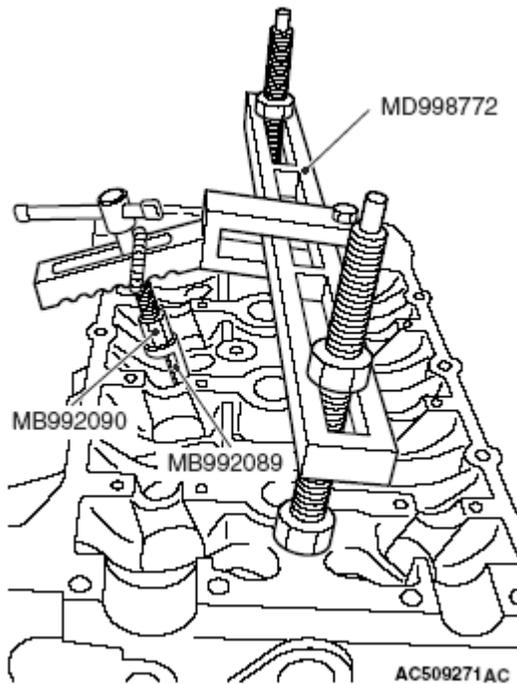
Identifying Special Tool MB992090 And Special Tool MD998772
